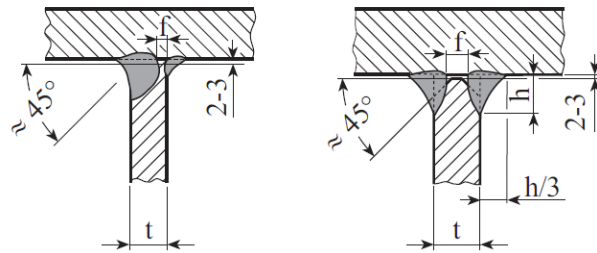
Single- and double-bevel welds with defined incomplete root penetration
